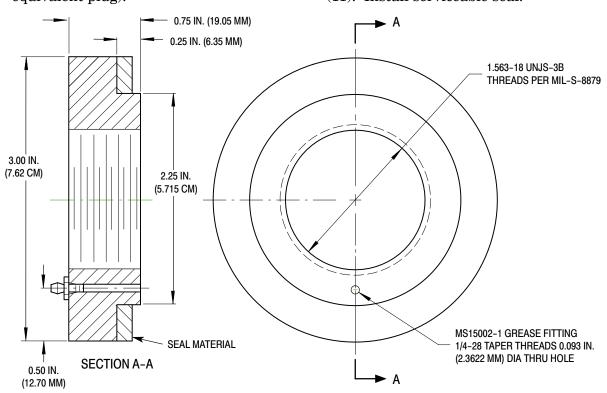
Tail Rotor Swashplate Bearing Regreasing
